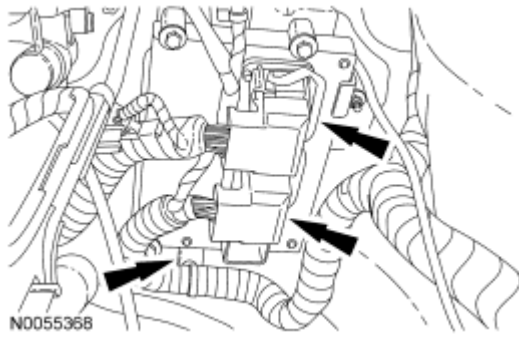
Identifying Electrical Connectors From Power Control Module (PCM)
